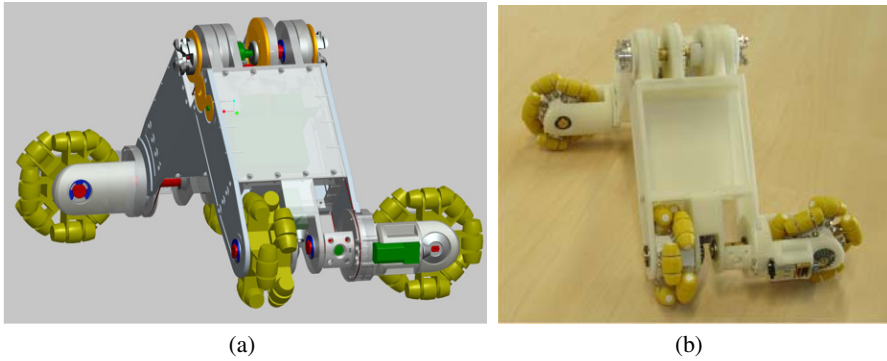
Autonomous tools; (a) CAD image; (b) Real prototype.
